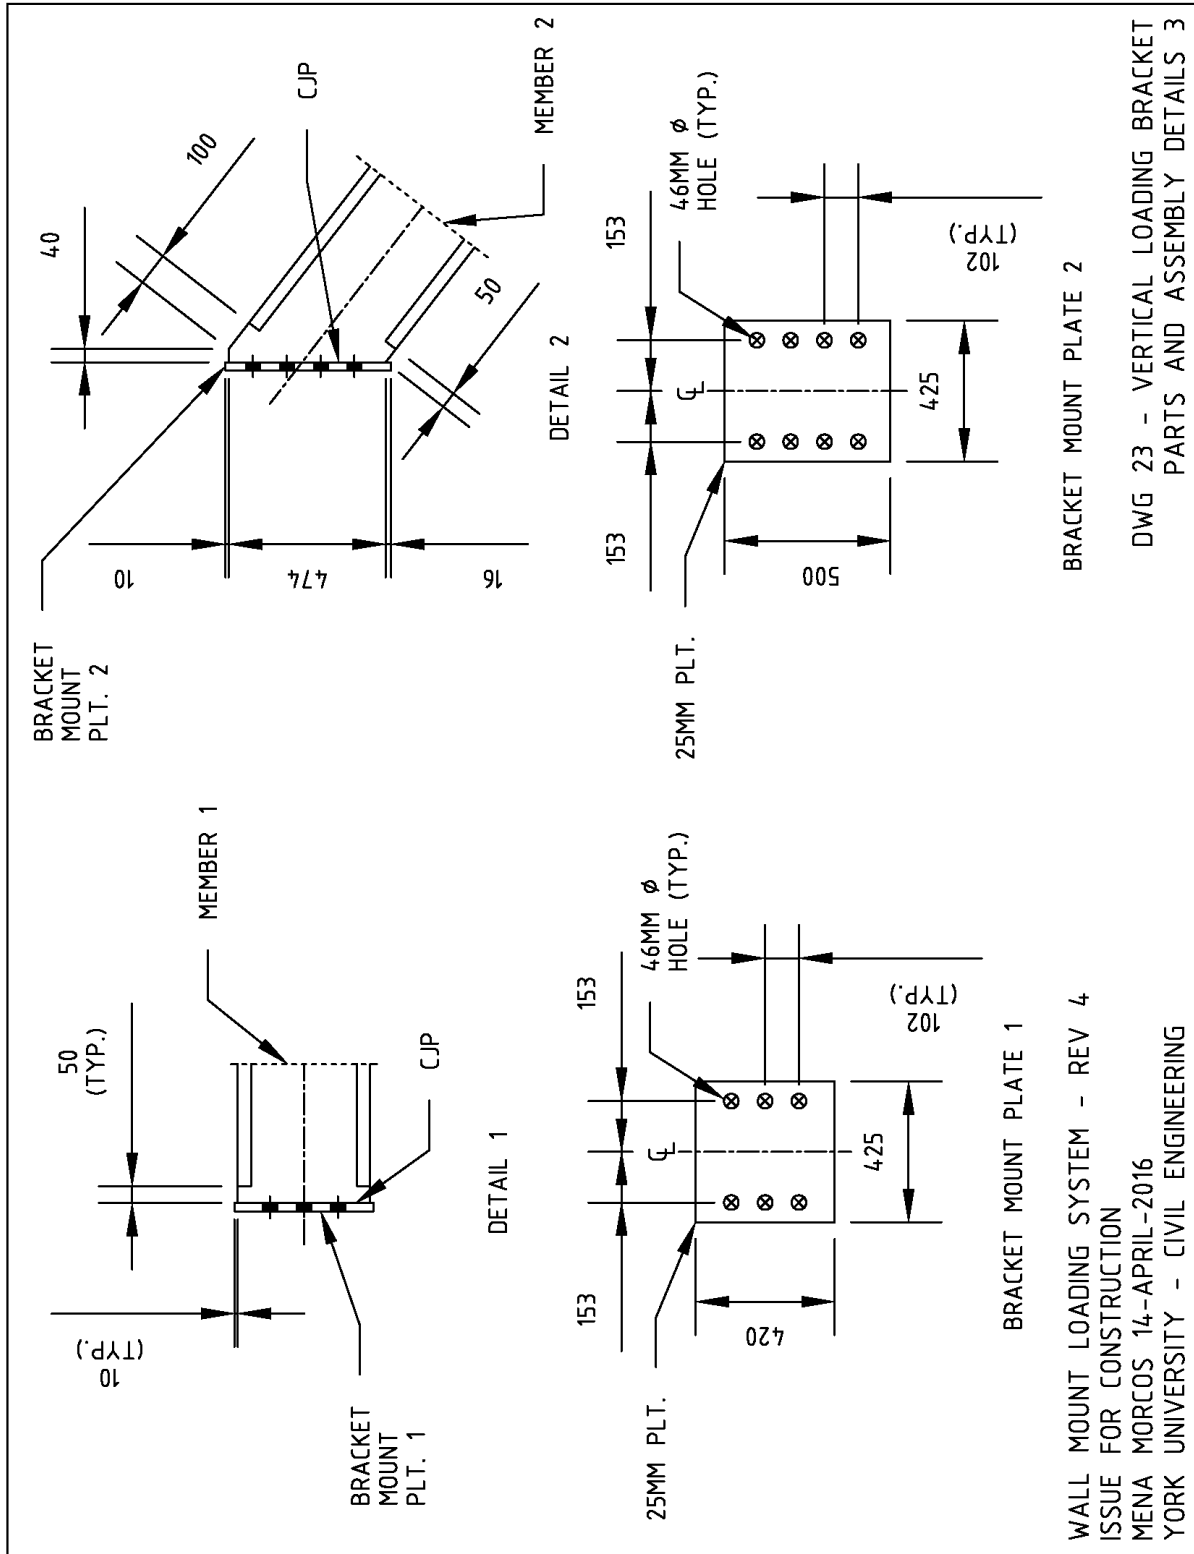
Wall mount loading system design and fabrication drawing – Drawing 23.
